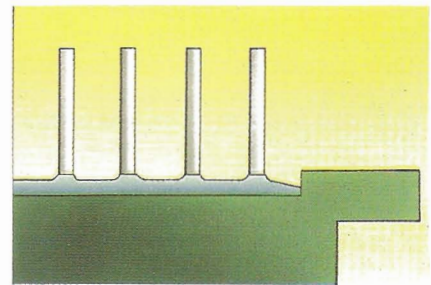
, the end result is a connector with extremely uniform, consistent seals from pin to pin.
